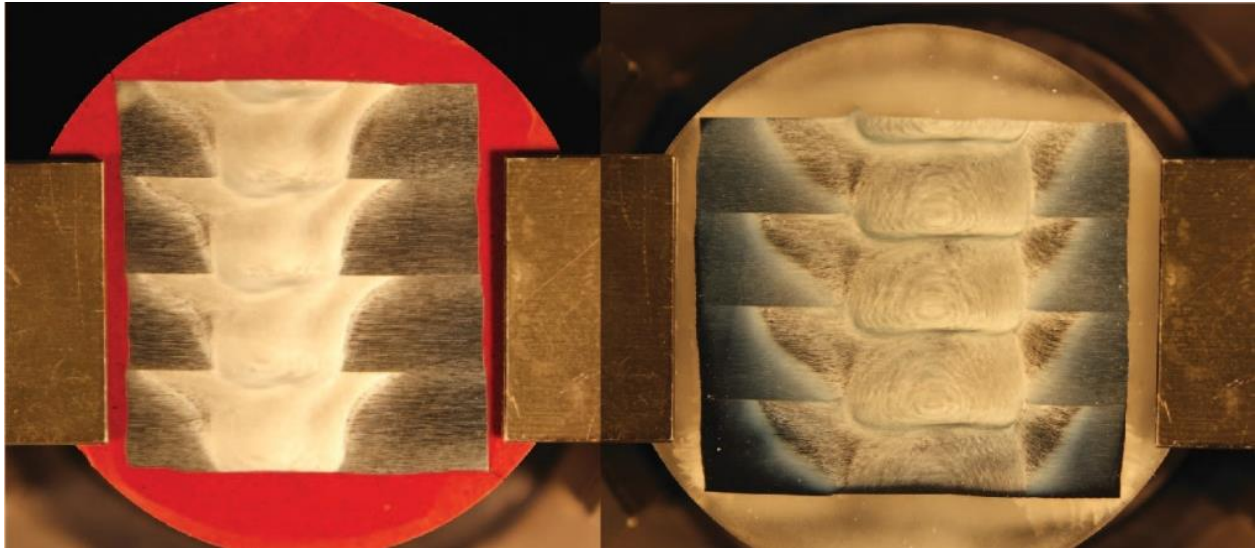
Comparison between cylindrical pin weld and flared pin weld
